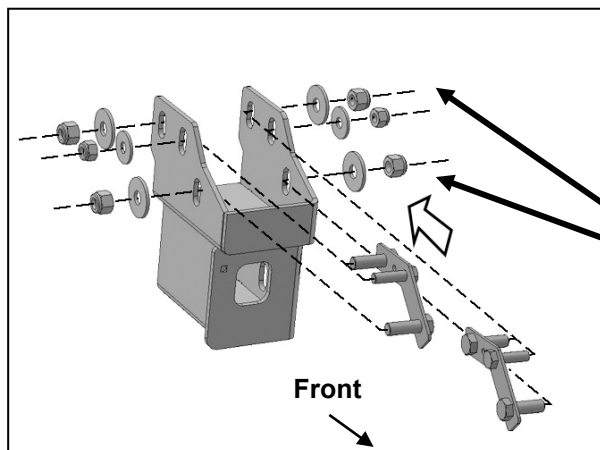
Remove bolts attaching bottom of bumper to brackets (arrows).
